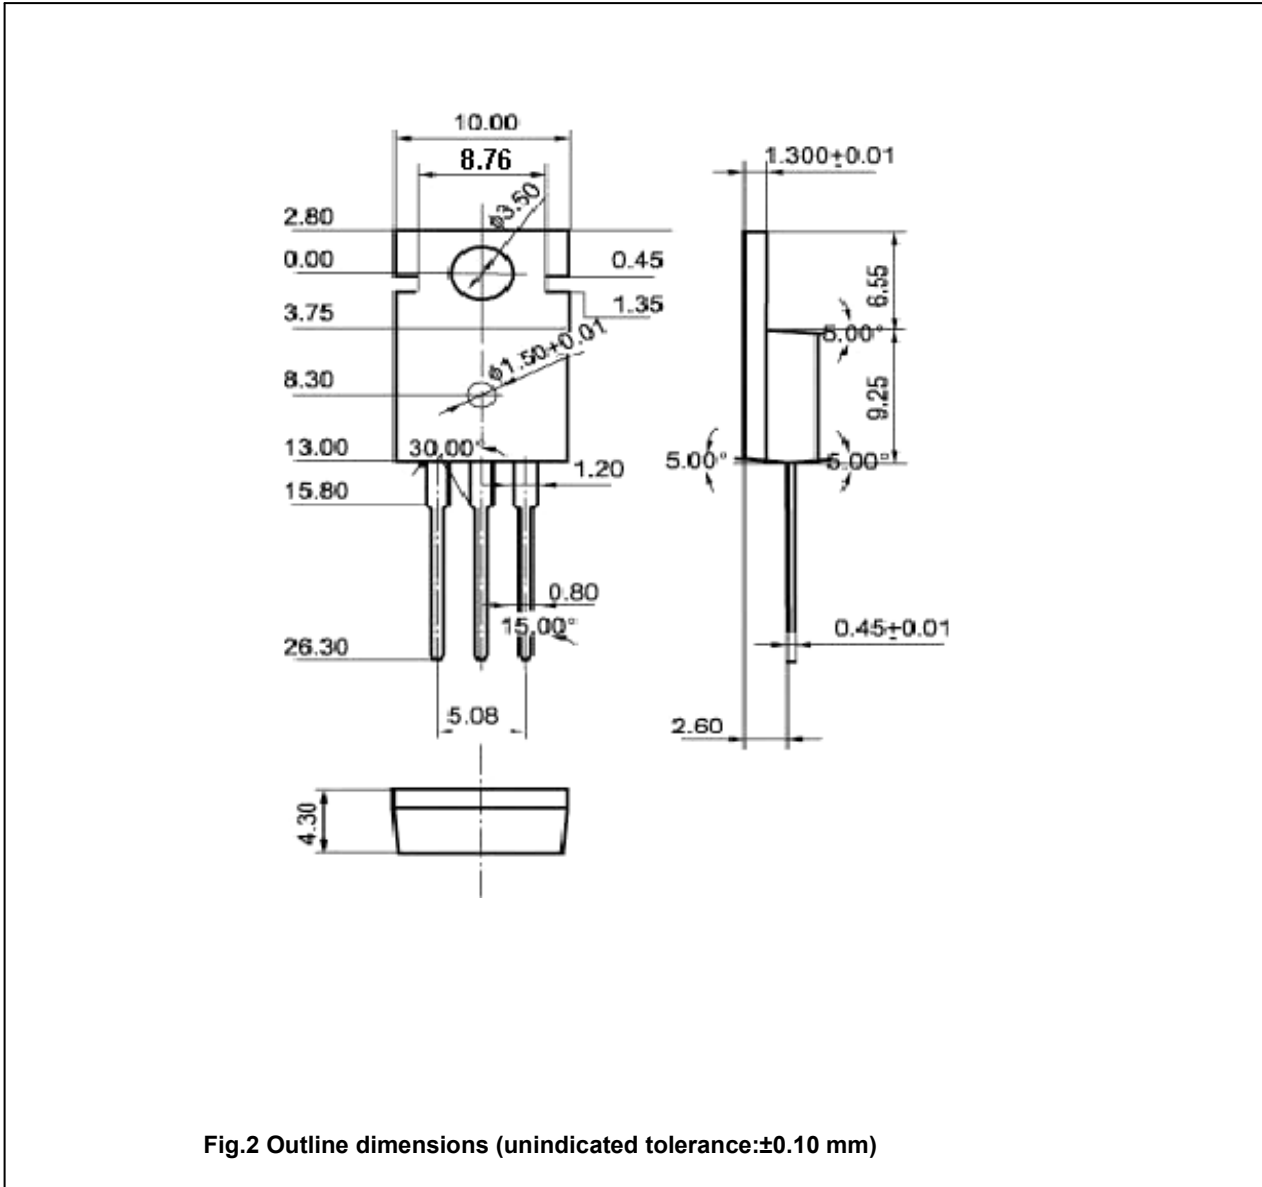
Outline dimensions (unindicated tolerance:  $\pm 0.10$  mm)
